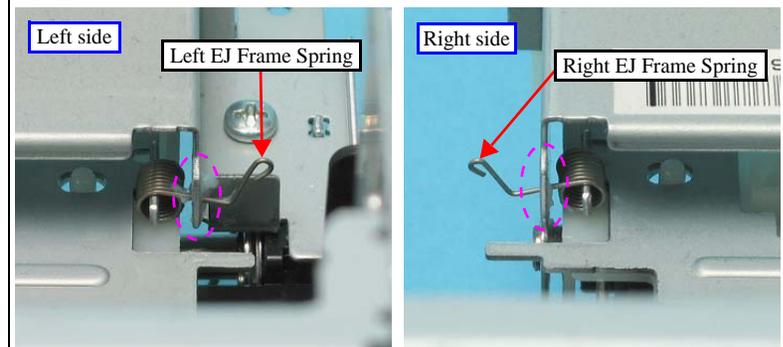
Installing the Paper Eject Frame Assy (3)
